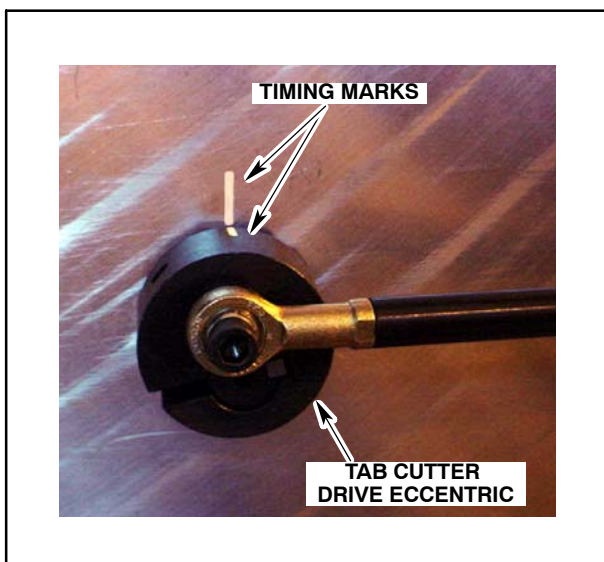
Position of Tab Cutter Drive Eccentric
